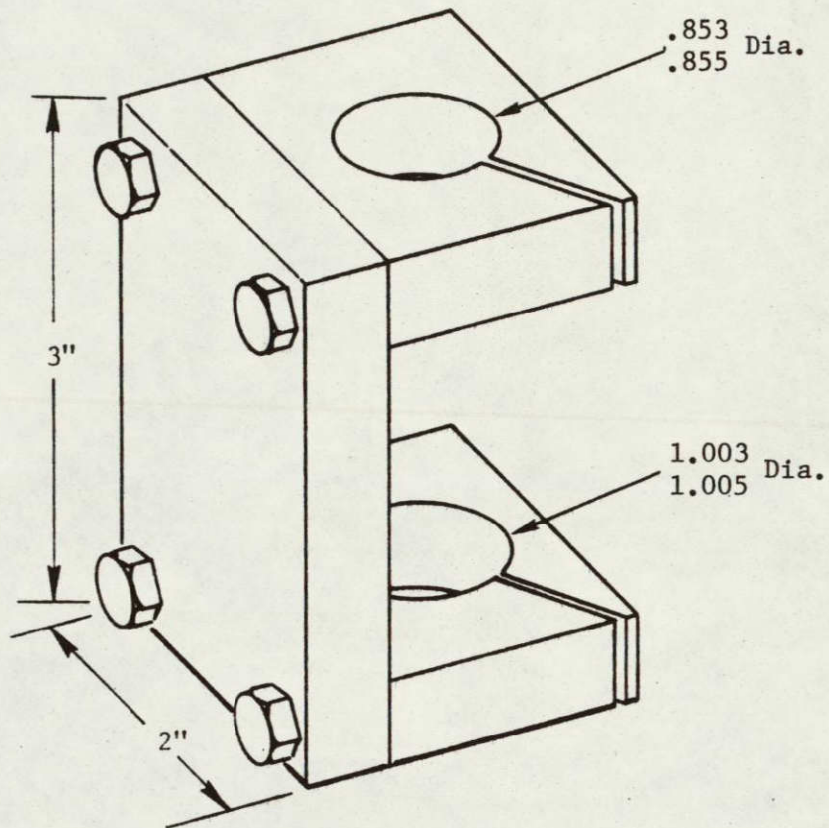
Sketch of Restraint Fixture Used in Tube-to-Header Welding Experiments.
